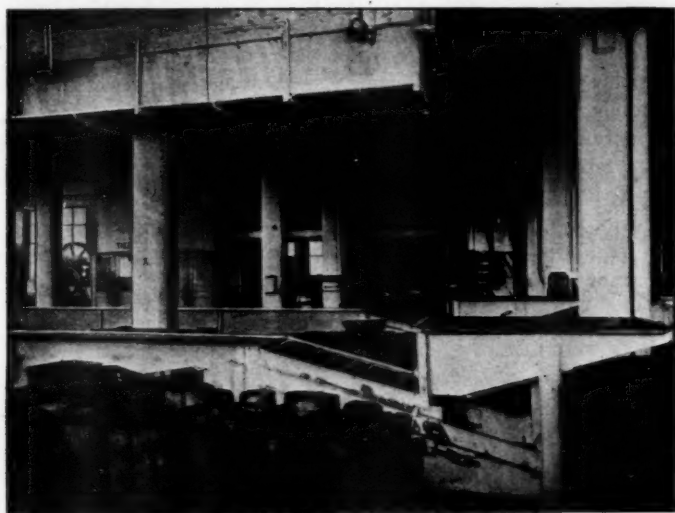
SORTING TABLES IN A LARGE MALLEABLE FOUNDRY MAKING PIPE FITTINGS
